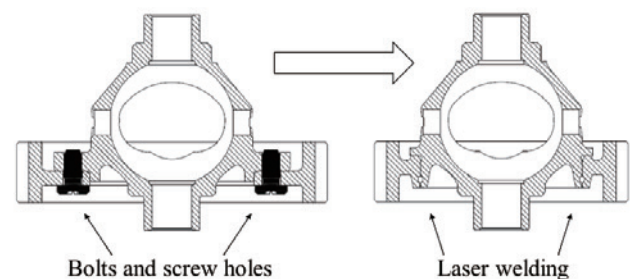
Downsizing and weight reduction by laser welding
